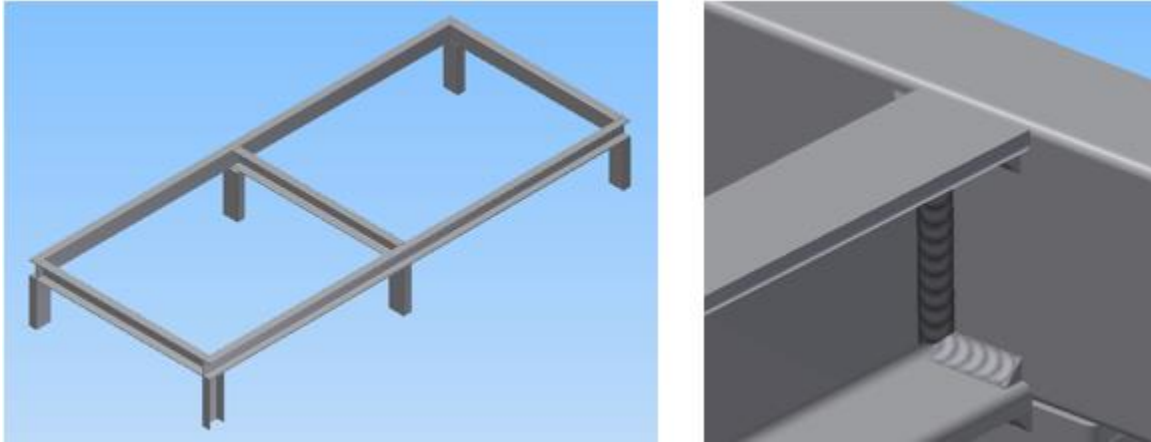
Support Structure Solid Model (left) with Weld Detail (right)
